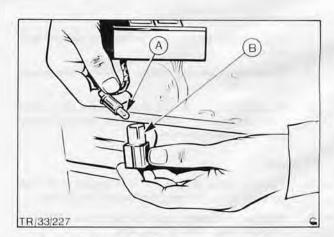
Removal of quadrant bulb A – Quadrant bulb B – Quadrant bulb housing
